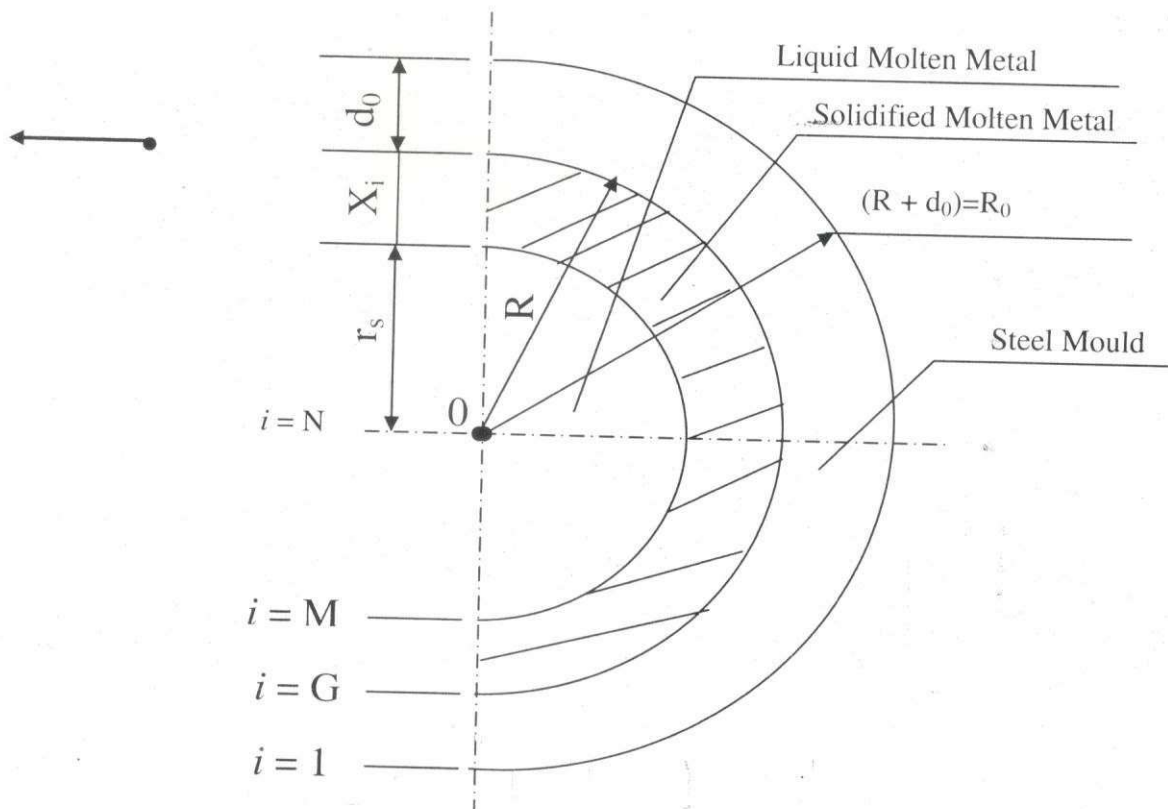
Schematic representation of solidification front in a cylindrical mould in one dimension (sectional view)
